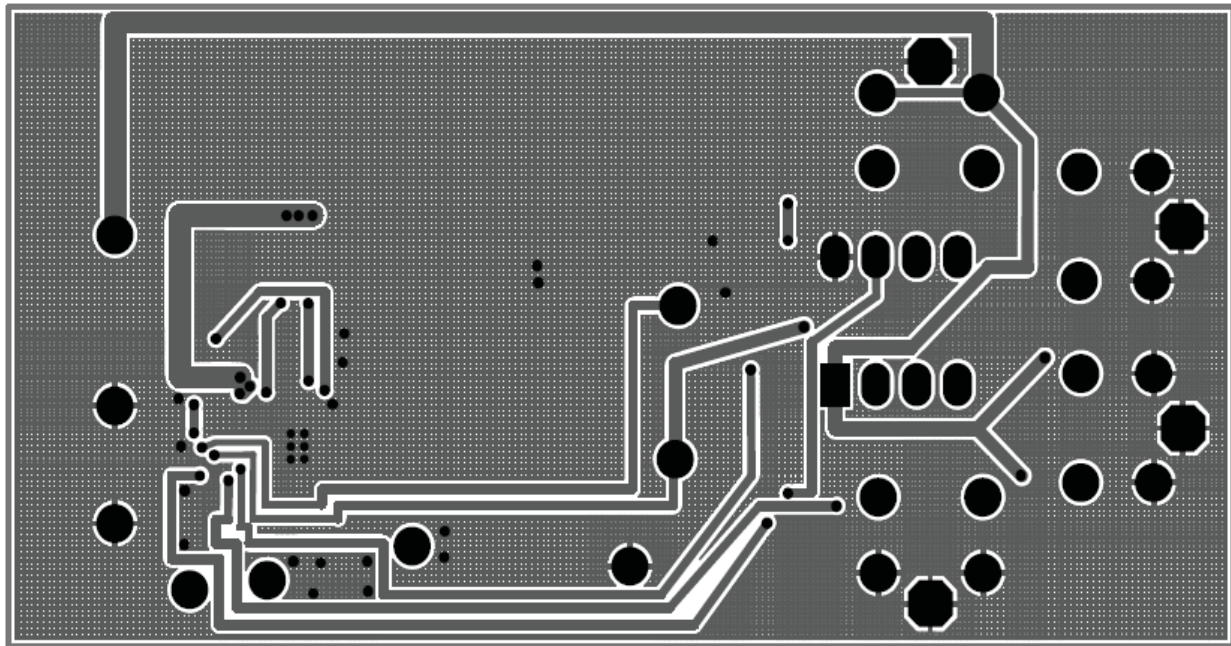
AAT2860 Evaluation Board Bottom-Side View Layout.
